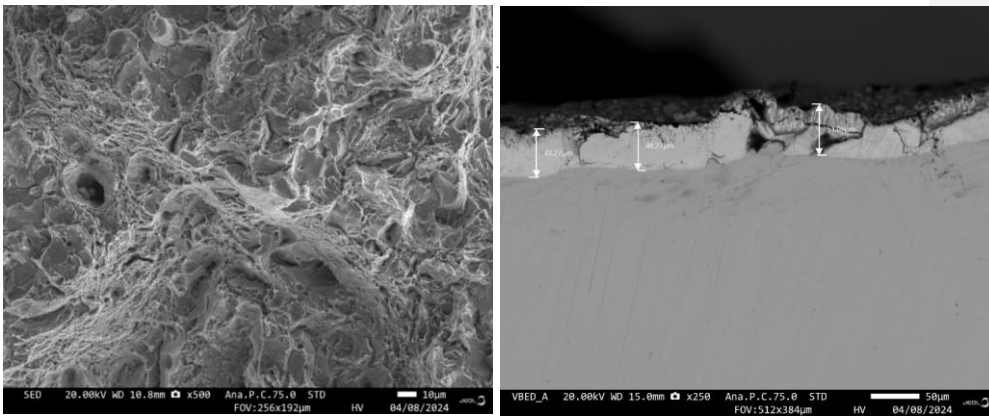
Fracture surface bolt B center, ductile, possible dimples and microvoid. Figure 49 Fracture Surface bolt C, Zn layer.
